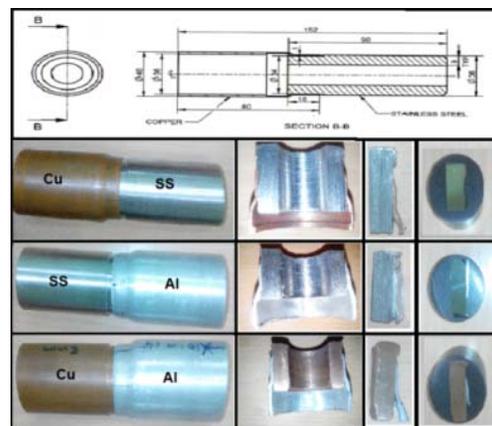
MPW specimen dimensional diagram with cut cross section and inner weld view.
